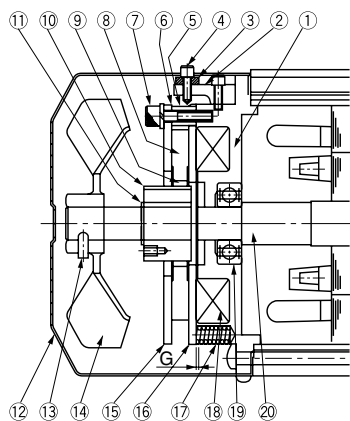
FB-01A1,02A1,05A1 (0.1kW~0.4kW×4 Poles) (FB-01A1 Without Fan)
